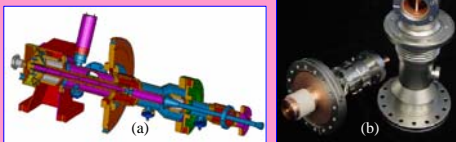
TTF-III power coupler a) cutaway view b) assembly unit.
